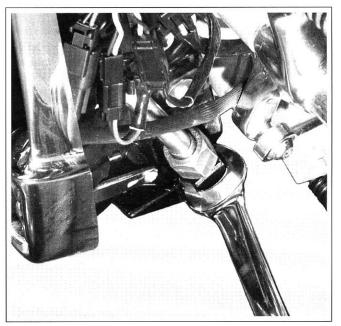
Support Wrench on Oil Cooler (radiator/oil cooler installed)
